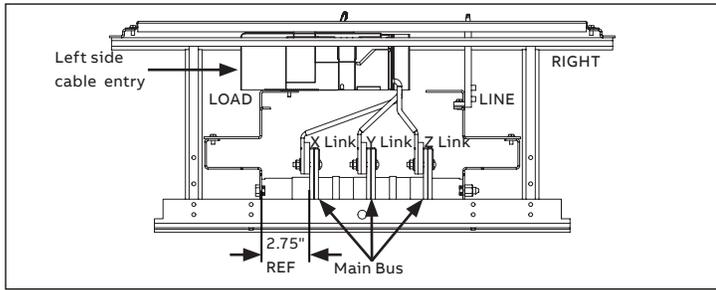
Single branch, XT4 Breaker; Left side cable entry, Assembly end view
